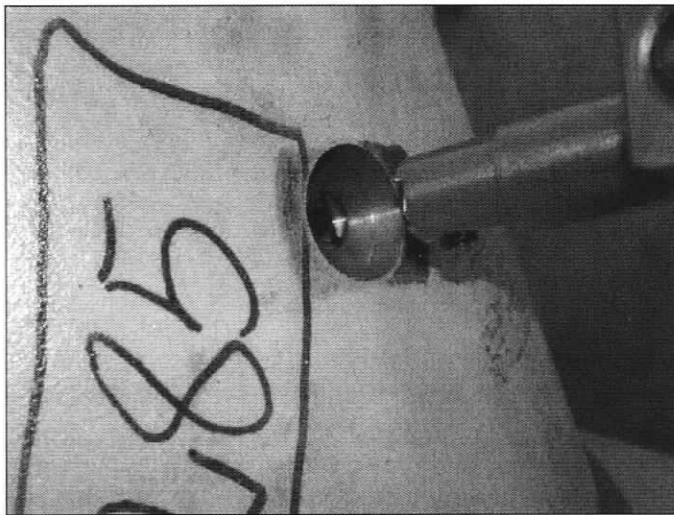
, Machining of pocket into the Conflo[®] JC-00 stator
